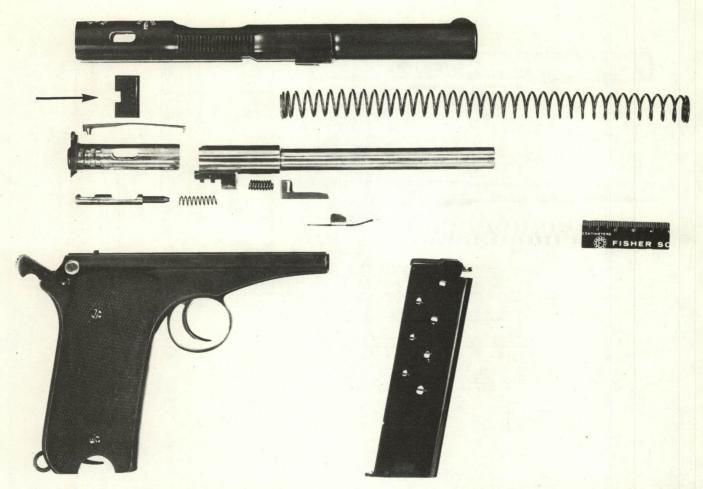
A disassembled view of the 1913-16 Campo-Giro pistol. Note the cross-key (arrow), which holds the breech piece to the receiver slide. The cross-key also retains the firing pin inside the breech piece. (Krcma)
